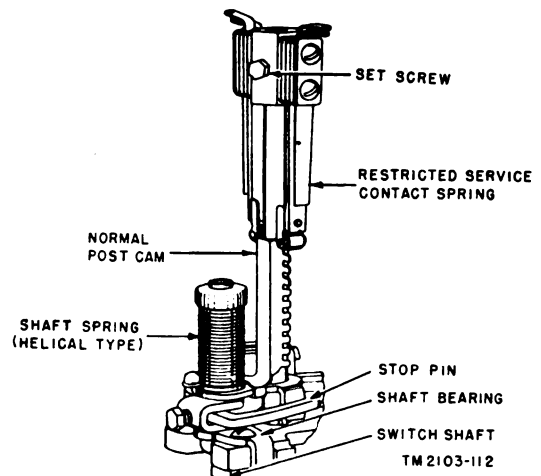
Helical-type shaft spring, normal post contacts, and cam.
